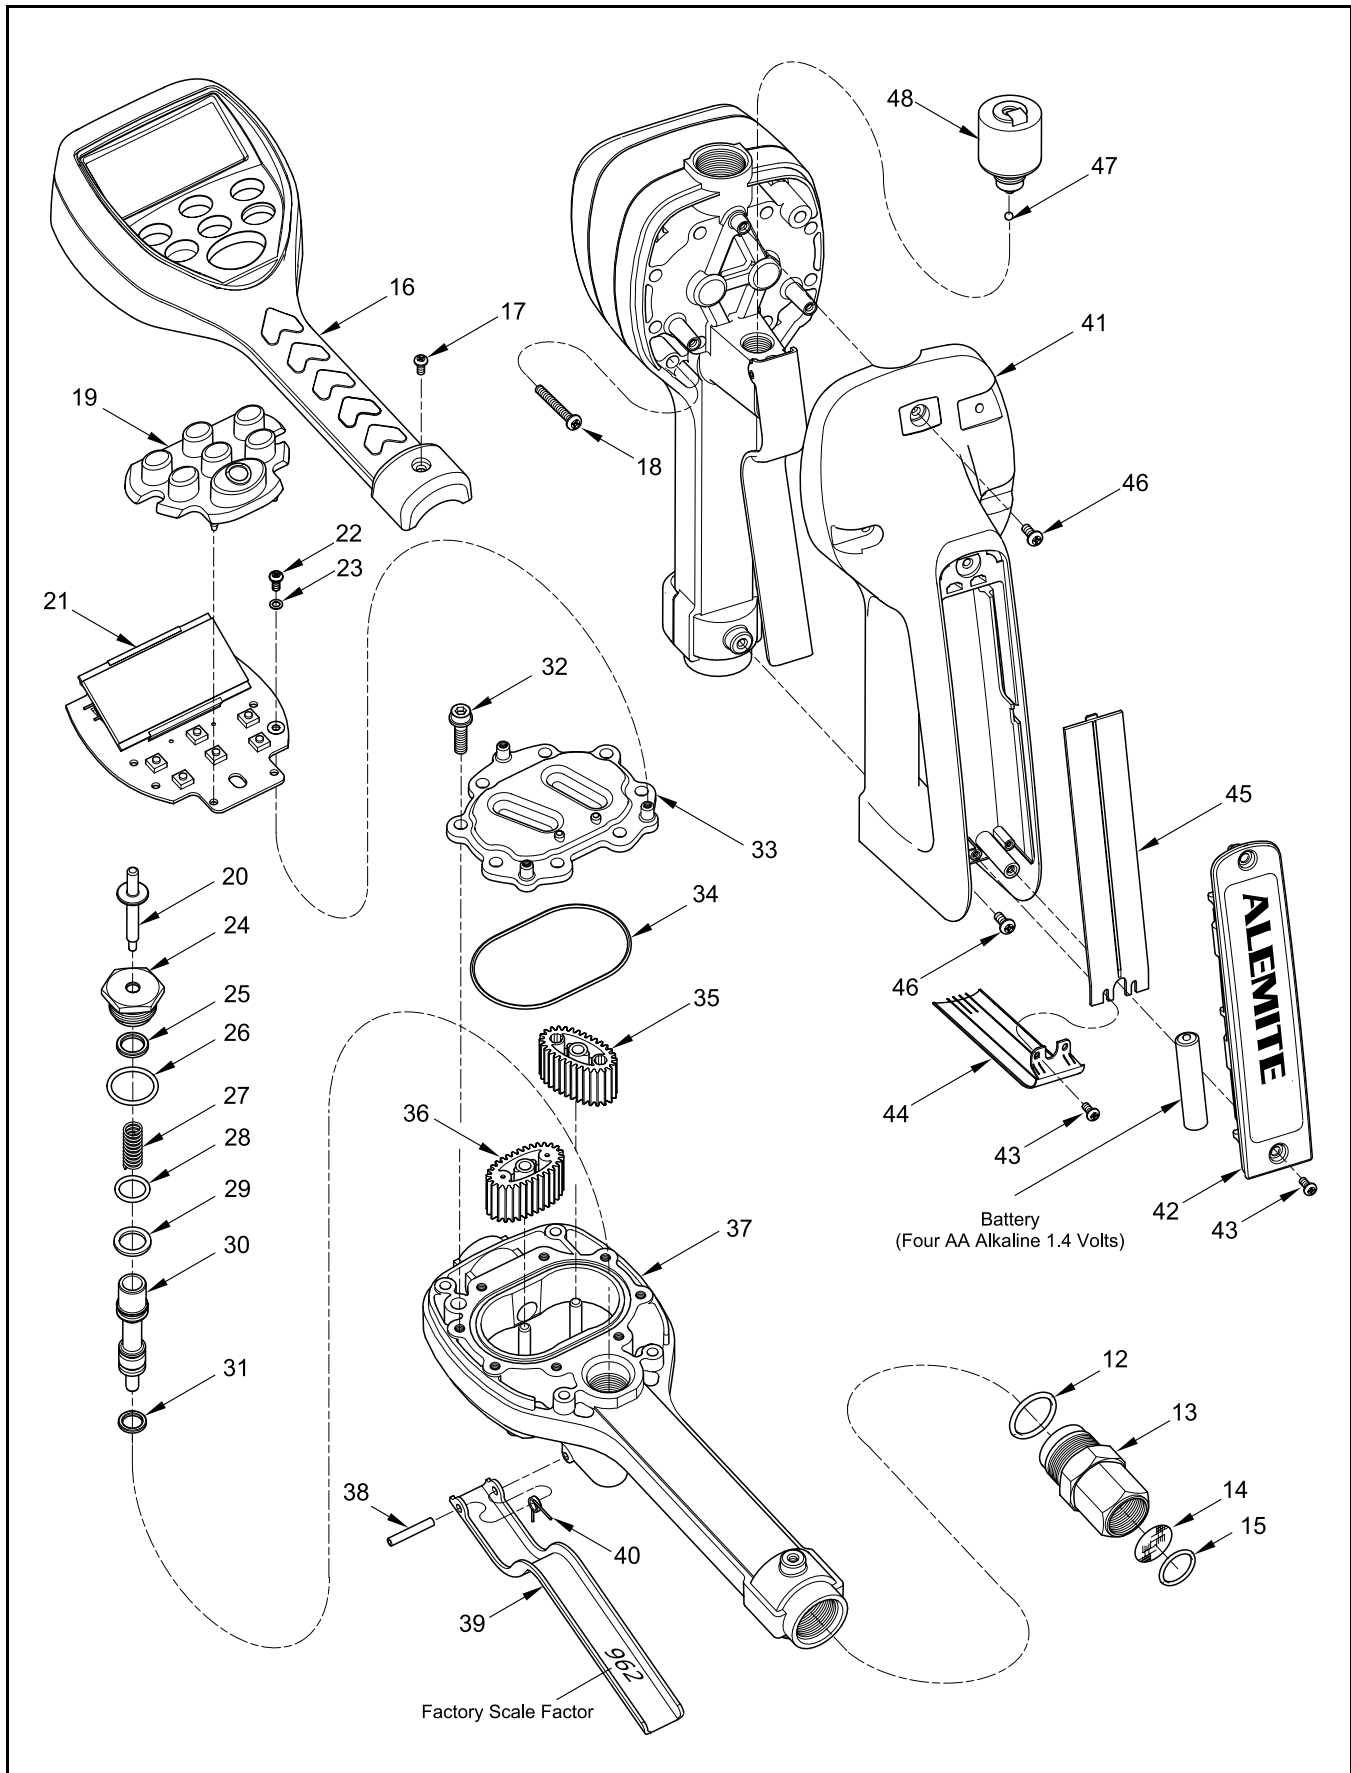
B Electronic Preset Metered Control Valve Model 3640 Series - Exploded View
